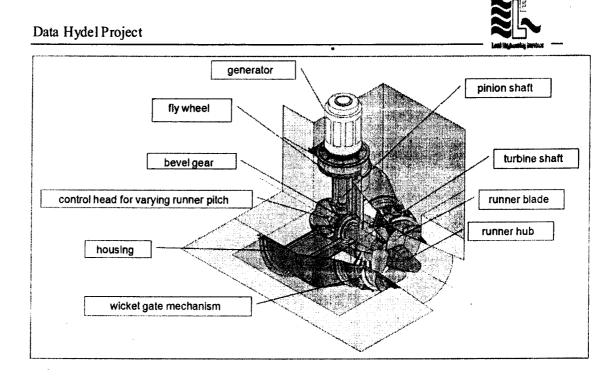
Arrangement of BGB Turbine with its Principal Components.
